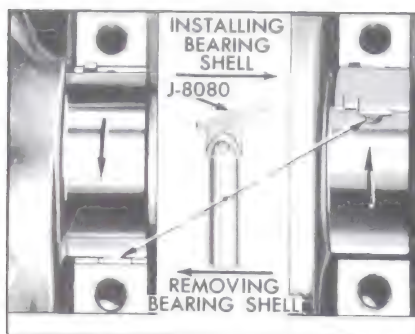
Removing and Installing Crankshaft Bearing Upper Shell
